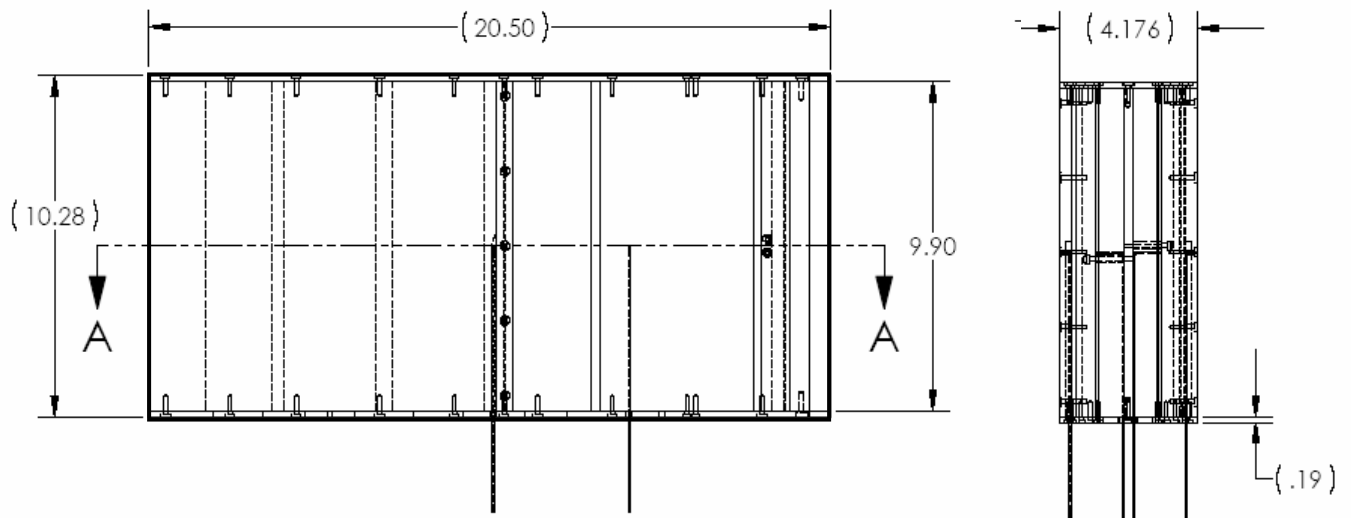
Model construction details, side and front. (Dimensions in inches.)
